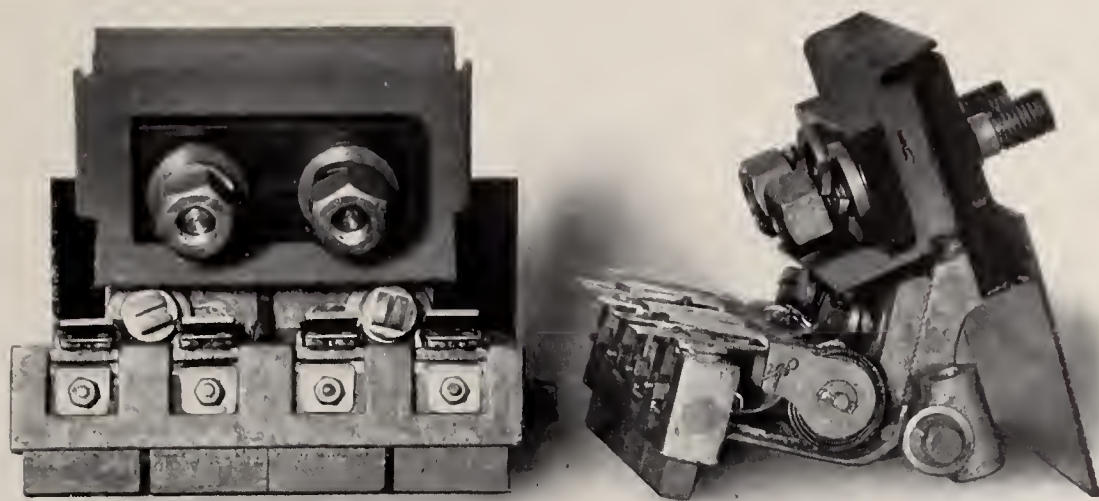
BRUSH HOLDERS OF THE WESTINGHOUSE RAILWAY MOTOR SHOWN IN FIG. 1
